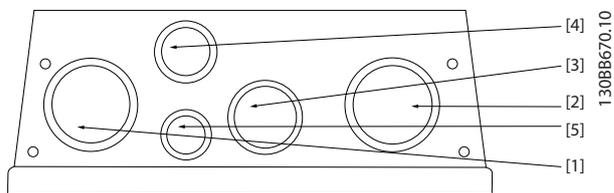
B2 - IP55 Threaded Gland Holes
